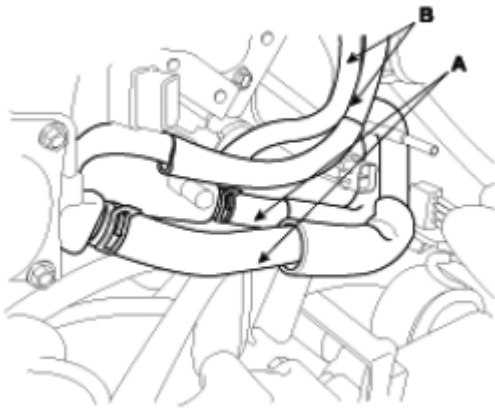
Identifying Heater Hoses And Throttle Body Heater Hose
